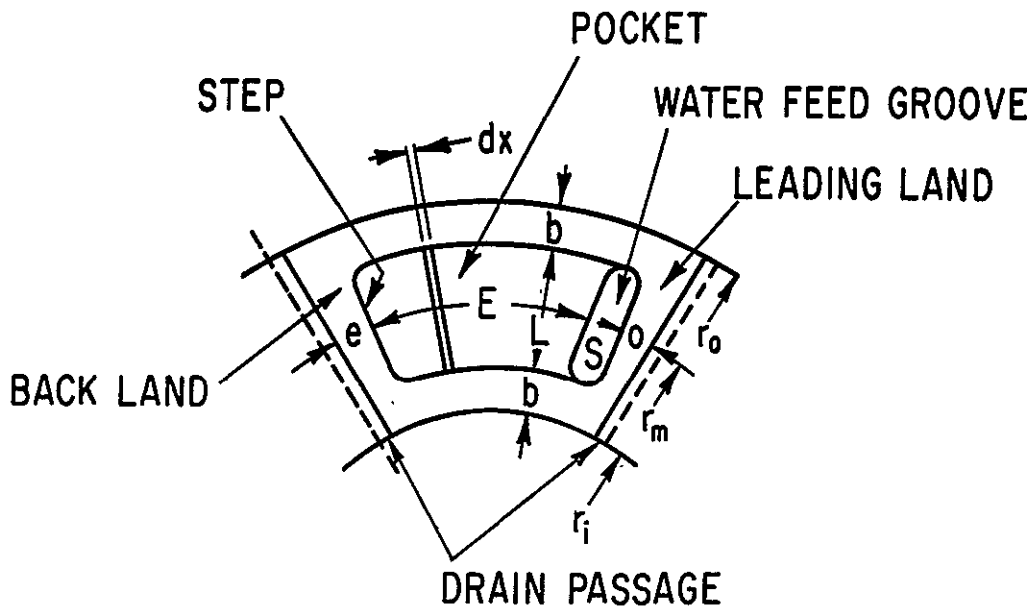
Diagrammatical representation of one pad of the shrouded step thrust bearing.
